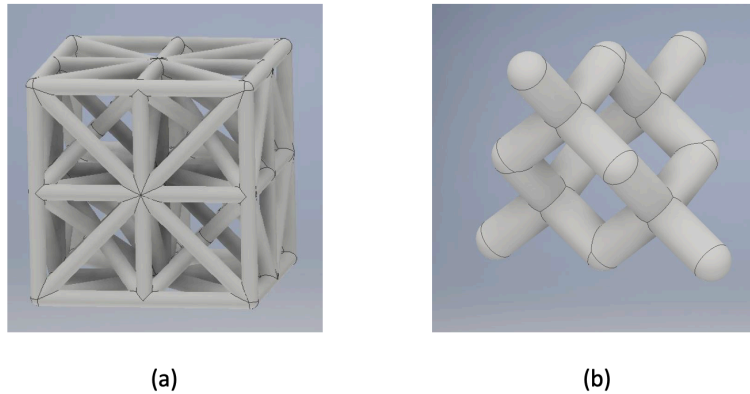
Base units for building test specimens: TET (a) and Diamond (b)
